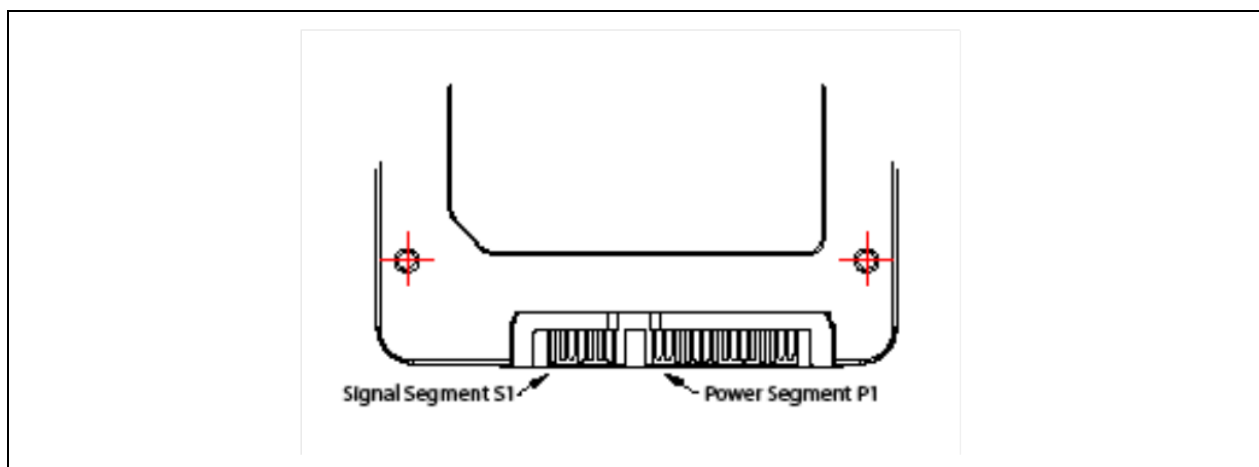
Dimensions for Full Size 2.5-inch Drives
